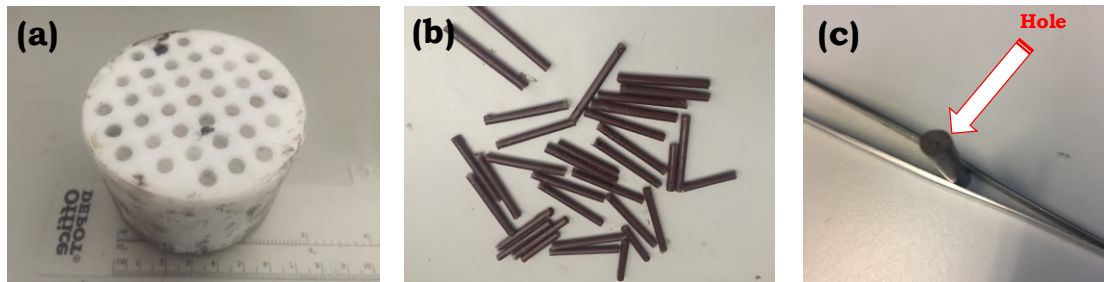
(a) The mould used to make the inductor bars, (b) the fabricated inductor bars, and (c) a drilled bar with a hole of about 0.8 mm.
